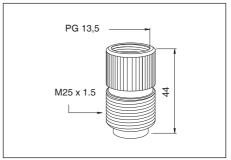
Mounting of sensor in metal FF40 fitting, using adapter K1523JA / K1523JC
